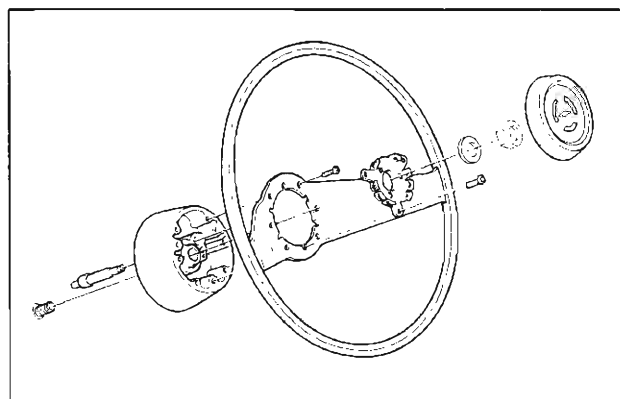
Simulated Wood Steering Wheel and Attaching Parts
